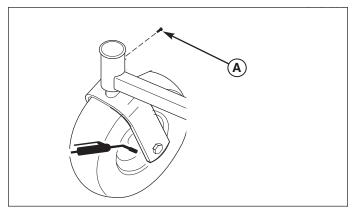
Front Caster & Wheel A. 1/4-28 Bolt
